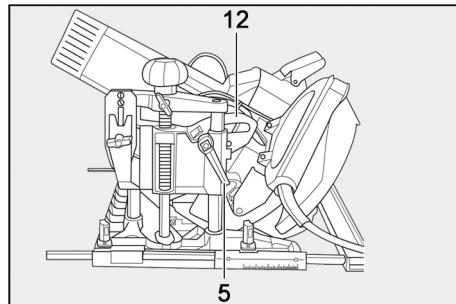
Setting the milling cutter for inclination and birthmouth cuts
